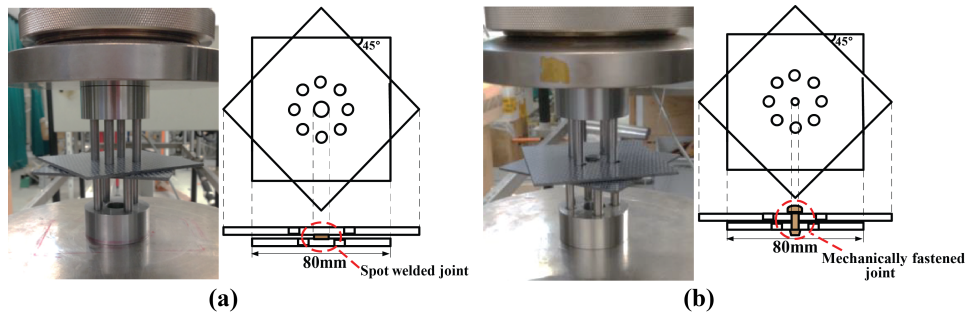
Loading fixture and specimen configurations for PT tests: (a) spot welded specimen; (b) mechanically fastened specimen.
